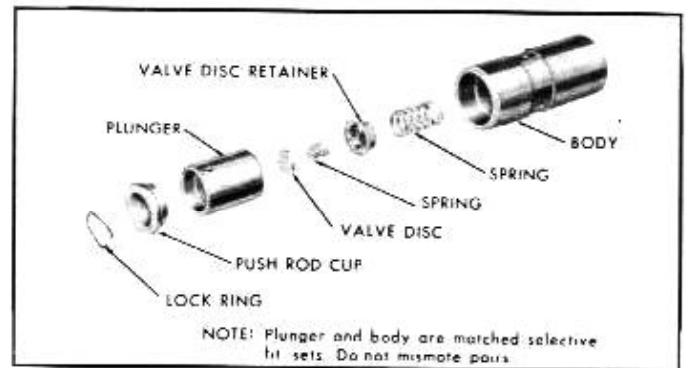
C-22—Disassembled Hydraulic Tappet Assembly
